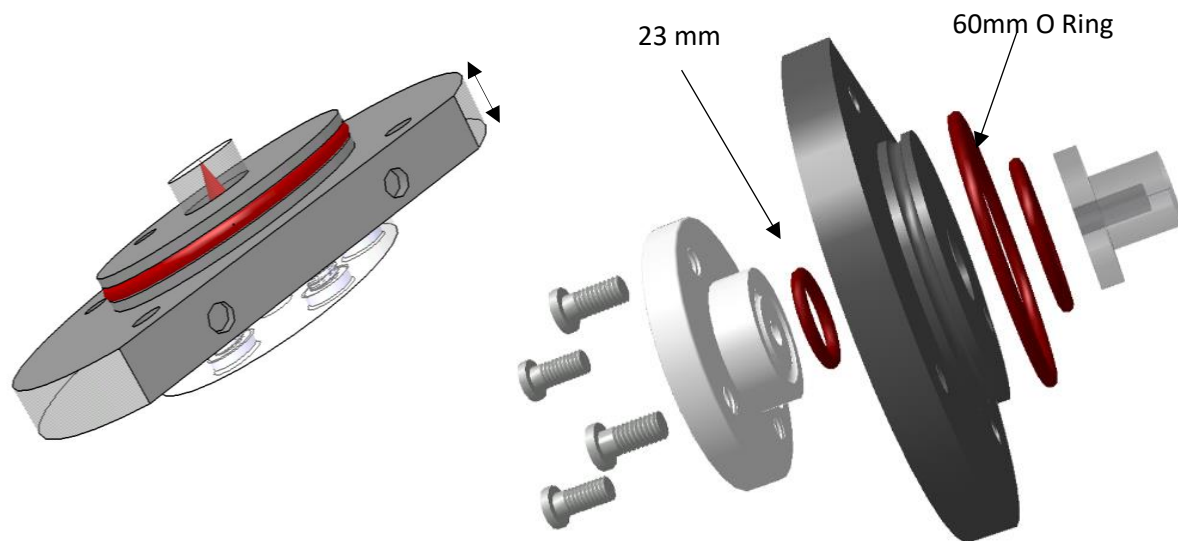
CATIA design of the Exploded view of the injector Unit positioned on top of the Fused Silica Receiver base.
